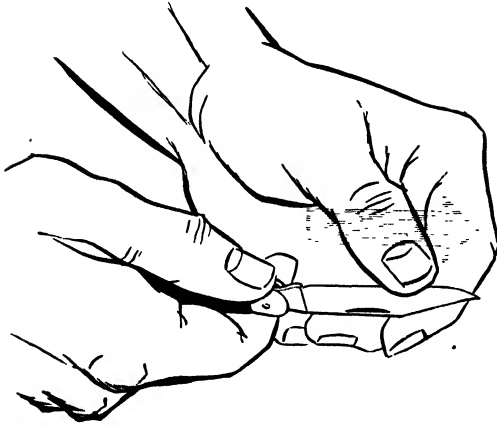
An excellent way to test a knife for sharpness. Draw the ball of the thumb lightly along the edge. Do not press. A sharp edge will "take hold" or pull on the tough cuticle. A dull tool feels smooth and will not "take hold."
